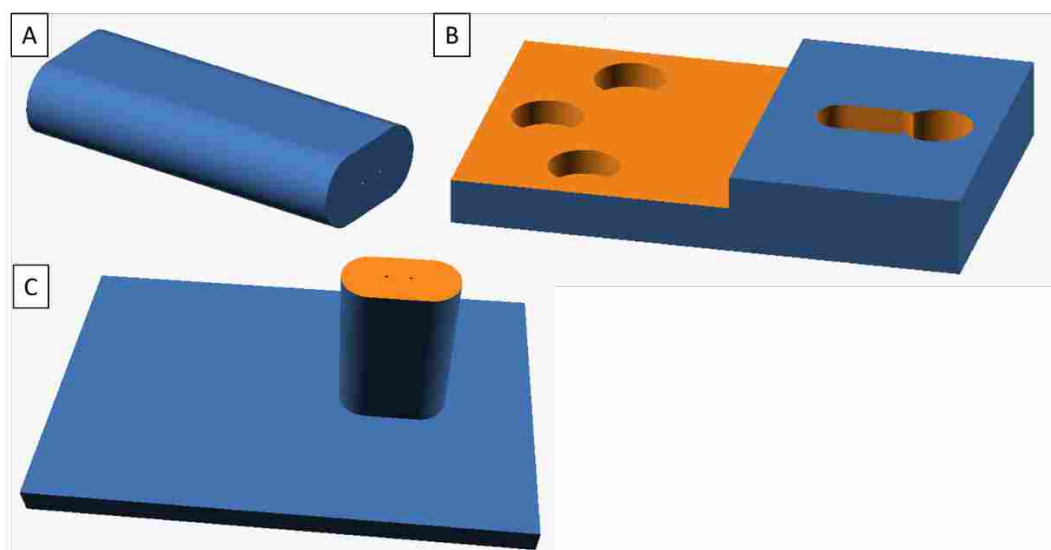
Designs for various electrode insert pieces. A) Electrode insert without any support features. This design broke off the glass slide easily. B) Extra support was placed on the μ CE piece, but this caused the insert to get stuck and break. C) Optimal design with support to attach the insert to the glass slide.
